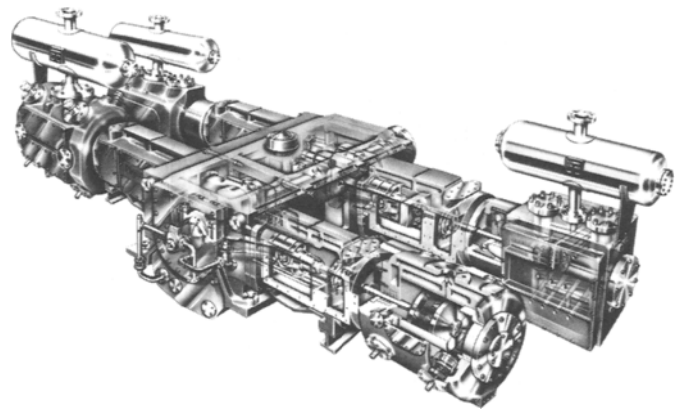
F. Lubricated and nonlubricated balanced opposed process reciprocating compressors, designed to API 618 code. Fixed- and variable-speed drives using gas or diesel engines, steam or gas turbines, or electric motor. Note power drive to connect to right side of cross-head box in center. (Used by permission: Bul. PROM 635/115/95-II. Nuovo Pignone S. P. A., Florence, Italy; New York; Los Angeles; and Houston, Texas. All rights reserved.)
